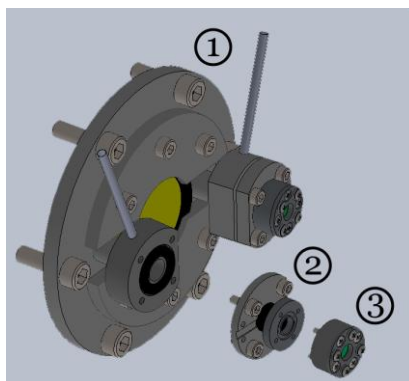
The end flange of the X-axis of the photolysis cell showing the different parts
